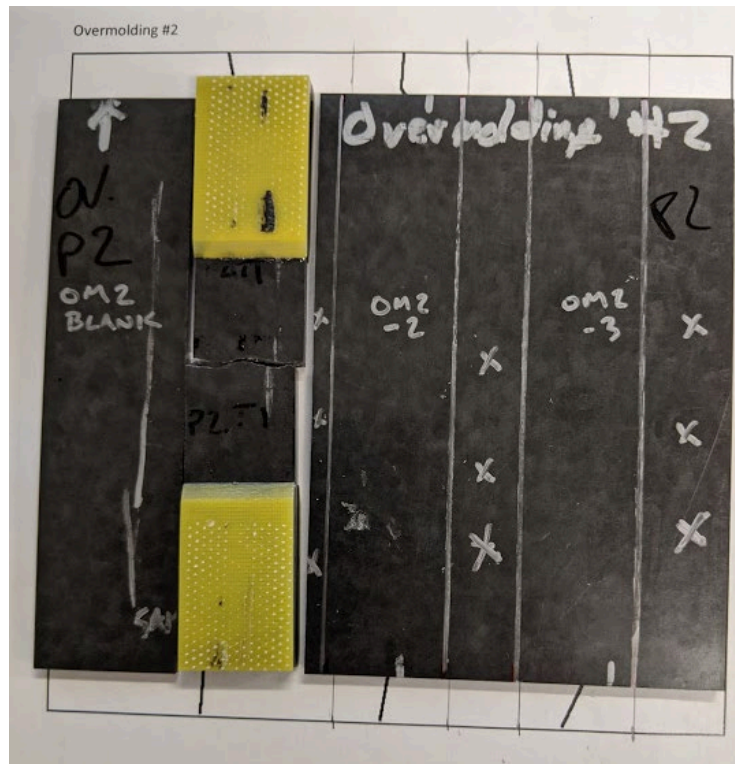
Sample of Modified ASTM D3039 Tabbed Tensile Specimen Cut from Flat Plate
